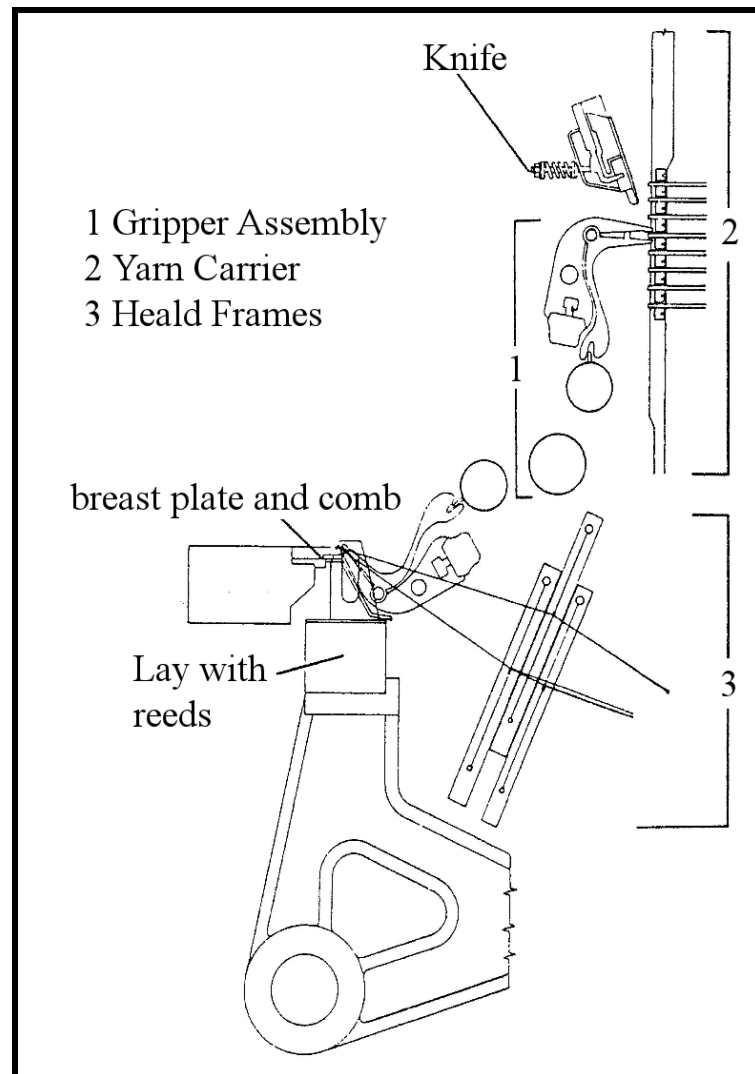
Gripper Assembly for the Axminster Weaving.
